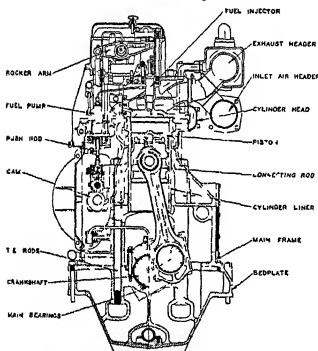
SECTIONAL VIEW OF A MODERN MEDIUM SPEED FOUR STROKE CYCLE DIESEL ENGINE
